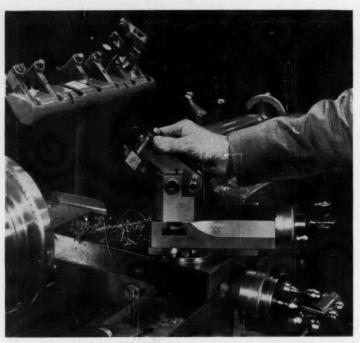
"Quik-Tool" attachment for Monarch lathes automatically positions tool-holders for various machining operations.
